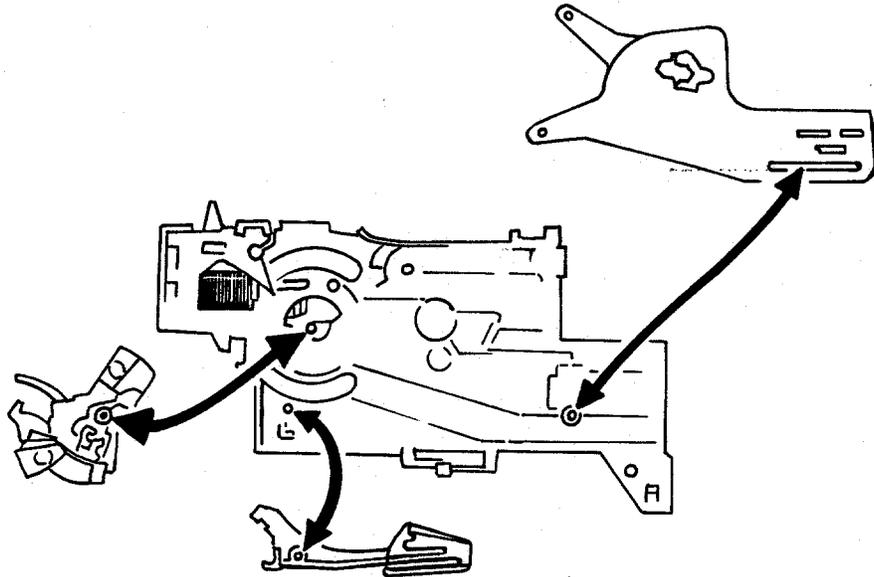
Removing Inertia, Walking Beam, Shutter Latch and Shutter Blades
